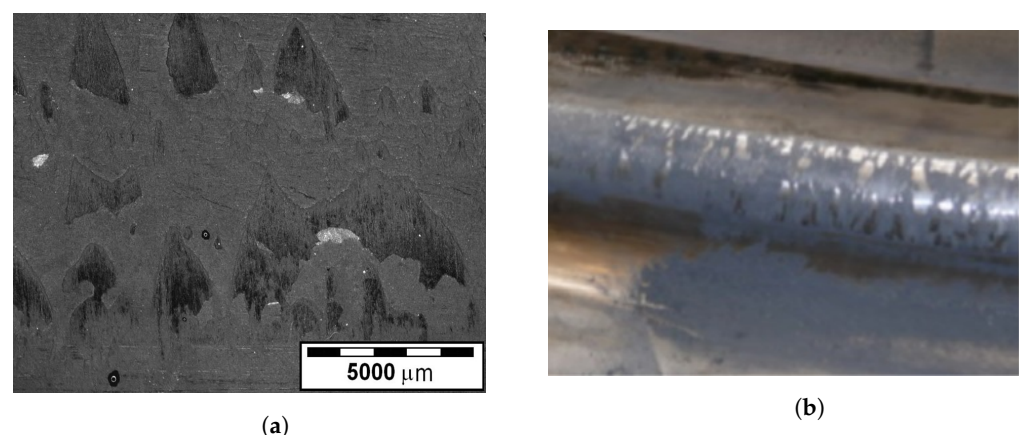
Gross material transfer on industrial tools. (a) Stereomicroscopy image obtained from a surface replica of a tool radius; (b) Picture obtained from a radius of a production tool.
